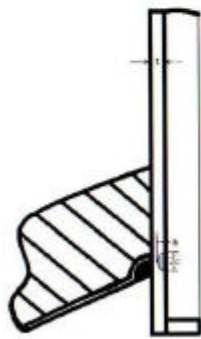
Inside, Axial Surface Flaws, At the Attachment Weld, Nozzle Downhill Side - Crack Growth Predictions
